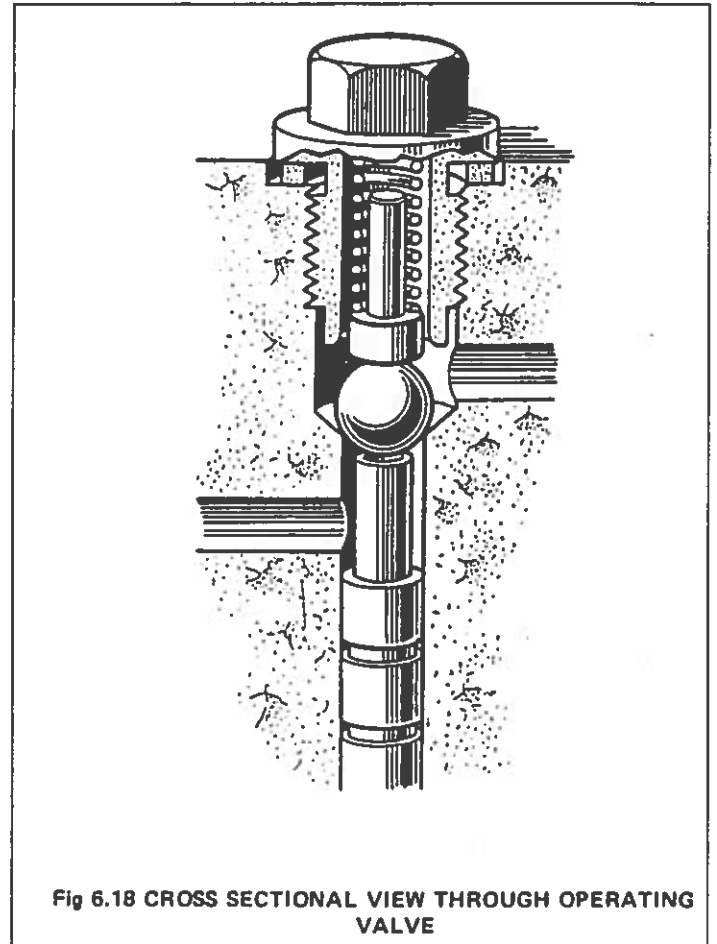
CROSS SECTIONAL VIEW THROUGH OPERATING VALVE
